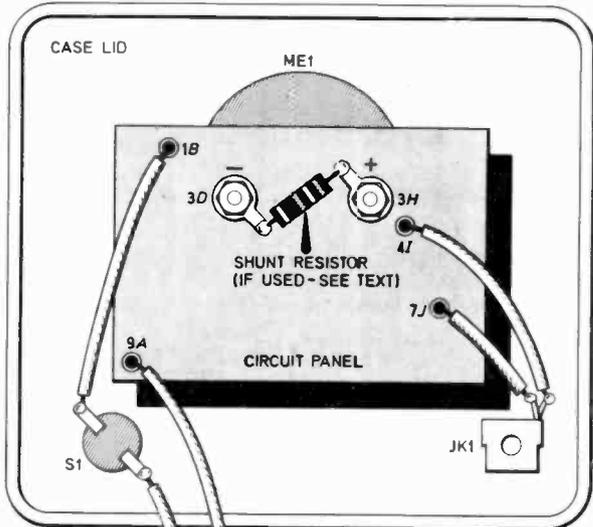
(above). The layout and wiring of the complete circuit board. This board is mounted by the meter terminals.
